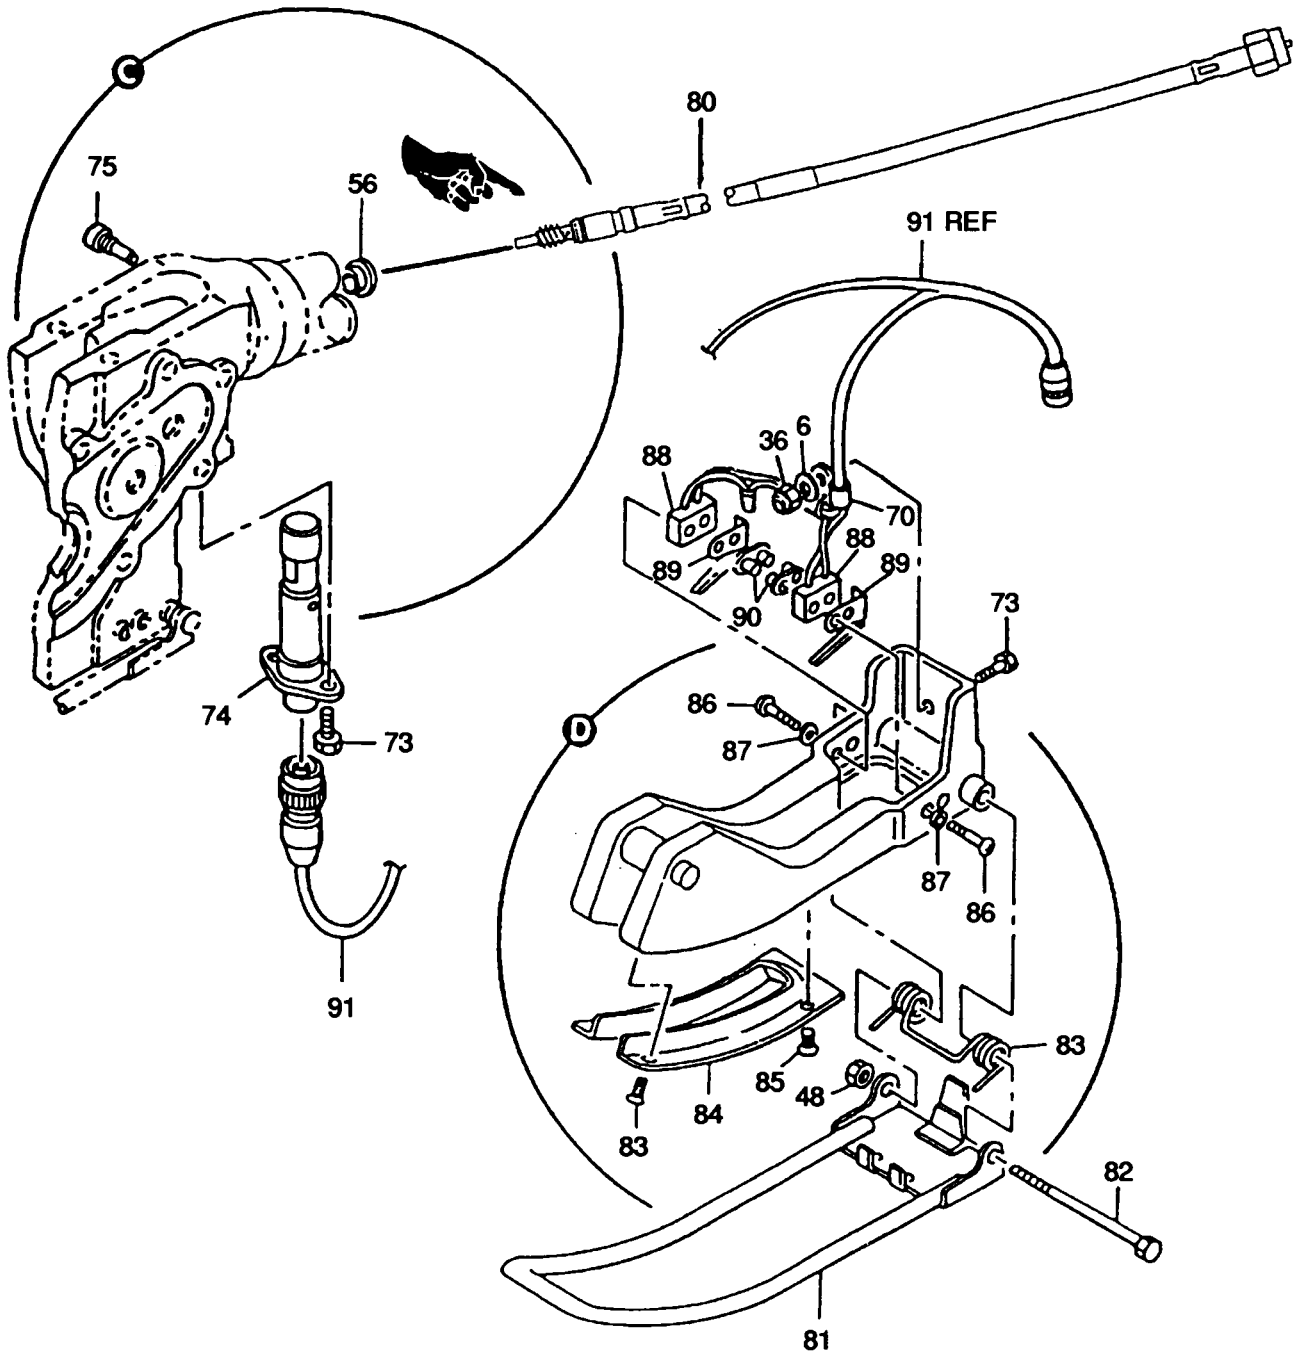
BOOM HEAD ASSY (SHEET 3 OF 4)
